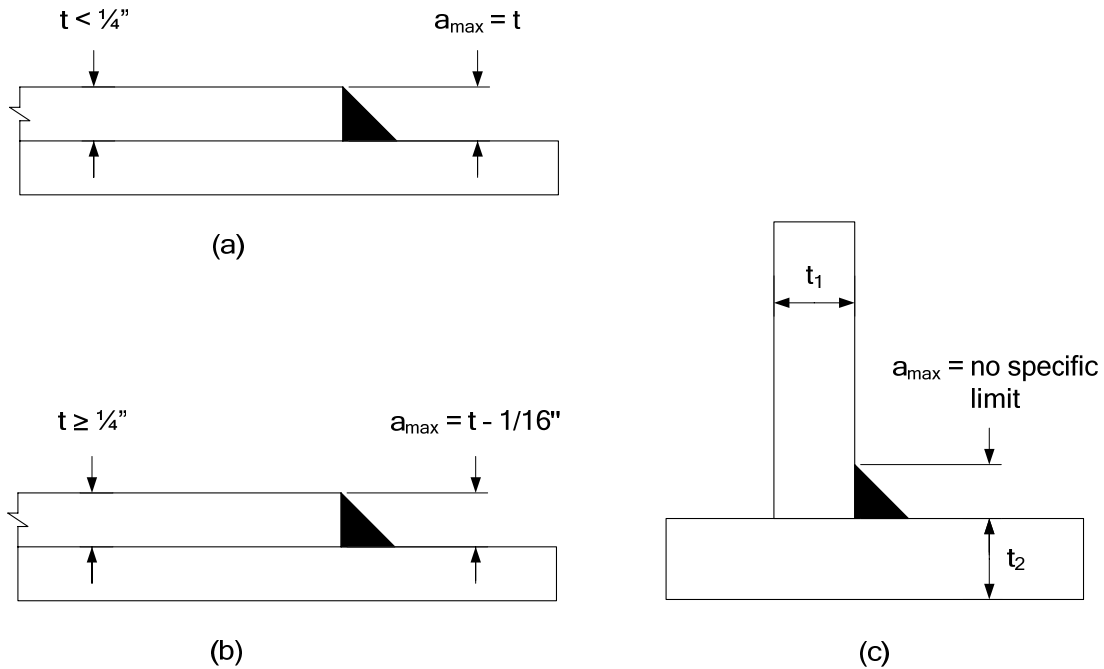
Maximum Size Requirements for Fillet Welds
